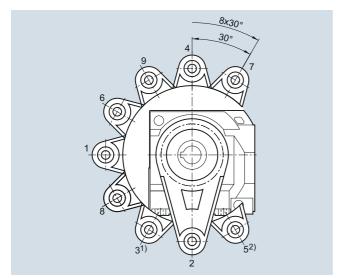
/11 Helical worm gearboxes CAD., Figure 1, sizes 39 to 89
